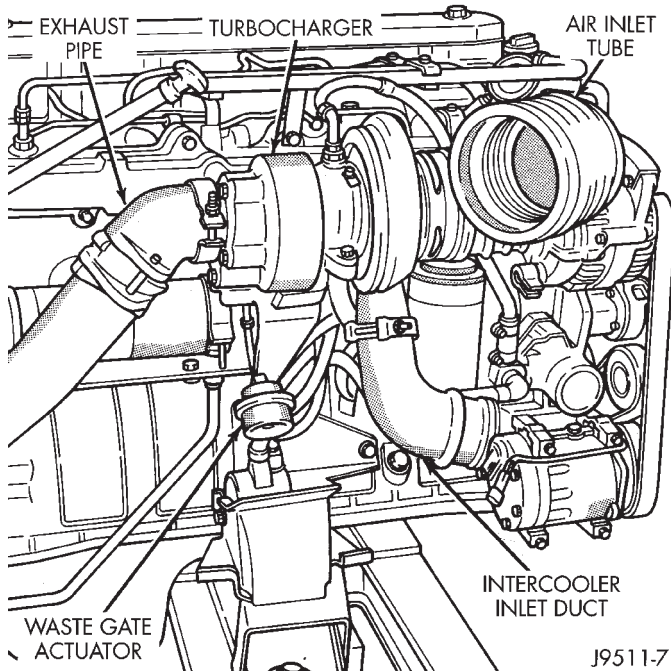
Oil Supply Line and Charge Air Cooler Inlet Duct
